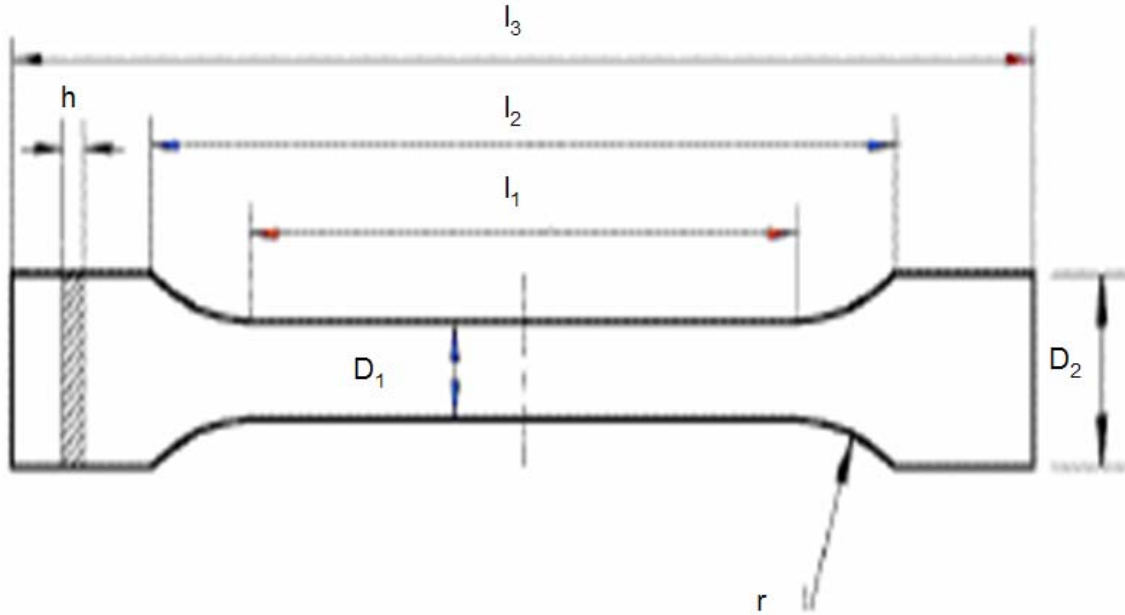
Tensile test specimen and Dimension (Dog Bone)
